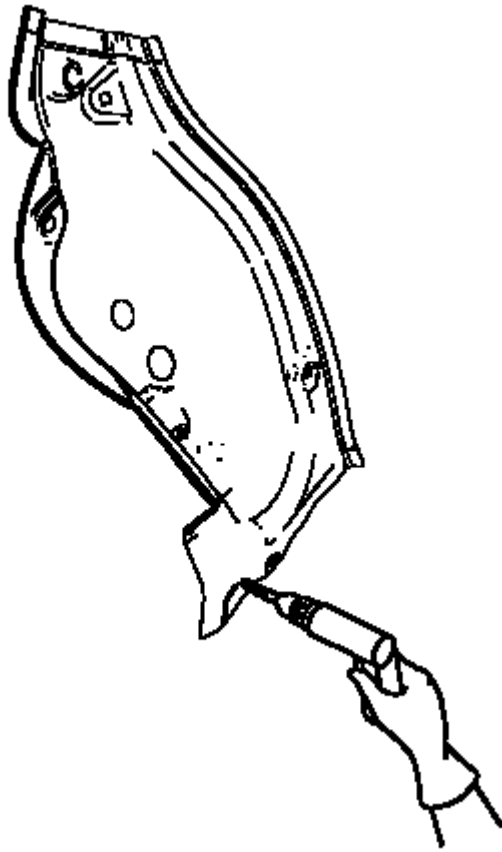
Drilling 8 mm (5/16 in) For Plug Welding Along Edges Of Tail Lamp Pocket
